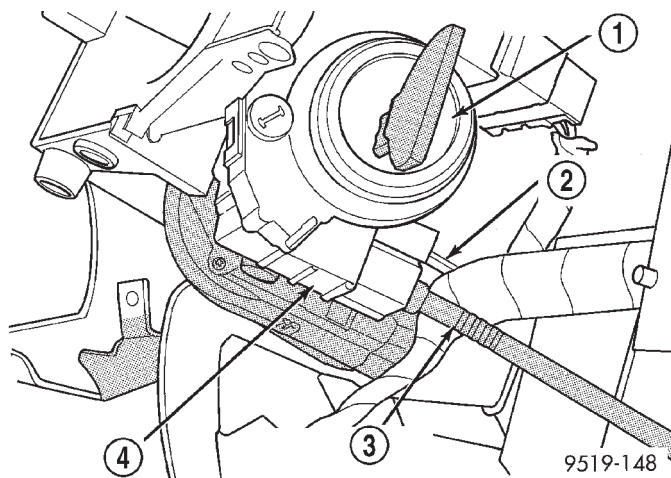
Shifter/Ignition Cable At Lock Cylinder Housing
